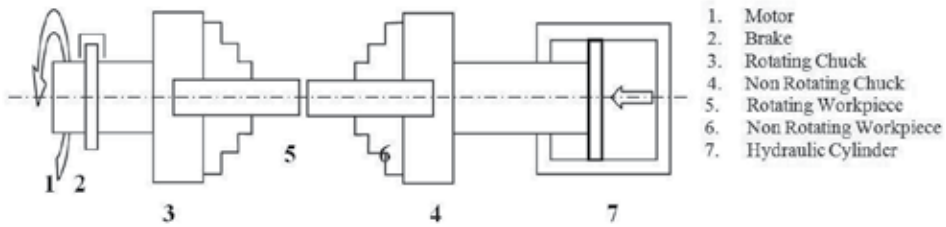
Layout of Continuous Drive Friction Welding
